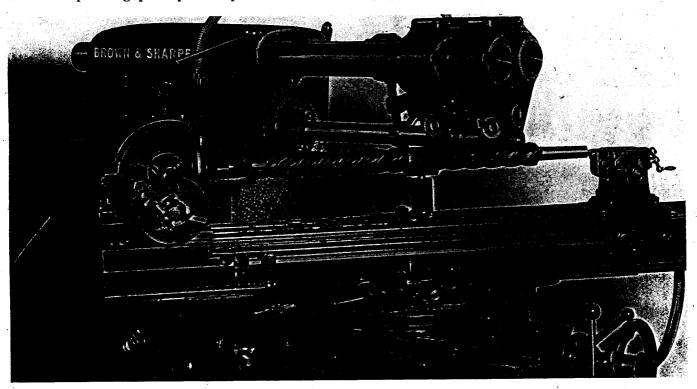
(above). Taking a finishing cut on a 4-tooth arbor-type helical milling cutter. A Universal machine is used; and the arrangement of headstock gearing (here enclosed by Change Gear Guard) and angle at which to set swivel table are taken from a chart furnished. On completion of a cut, the work is returned at fast travel to starting position and is plain-indexed for the next cut.
